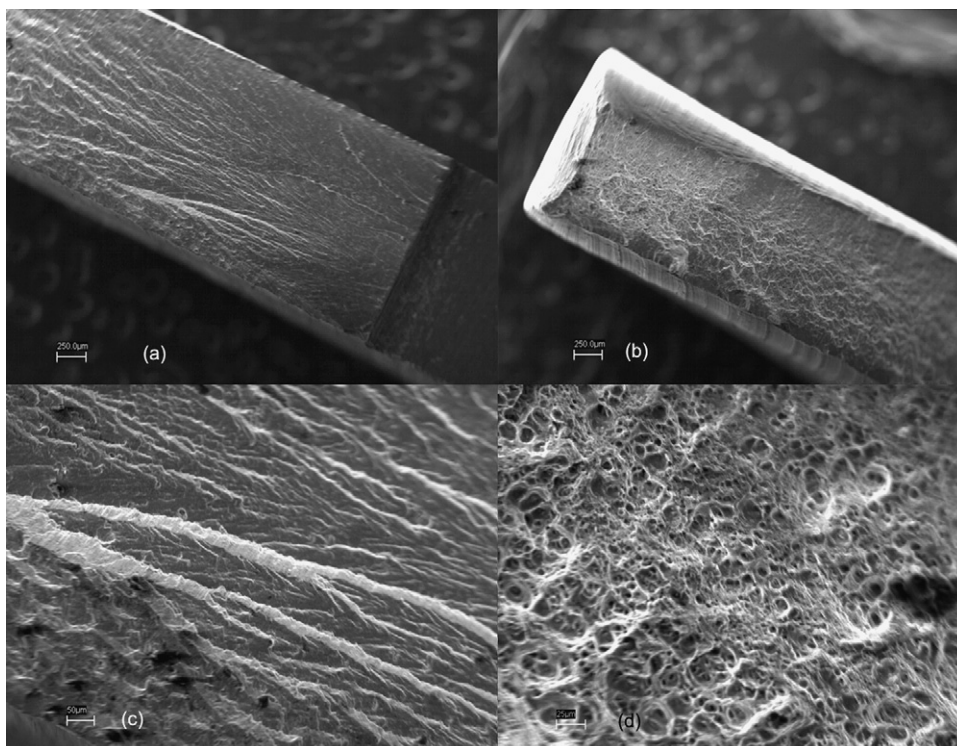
Fracture surfaces of the fatigue specimen (welding speed of 325 mm/min) tested at 80 MPa.
